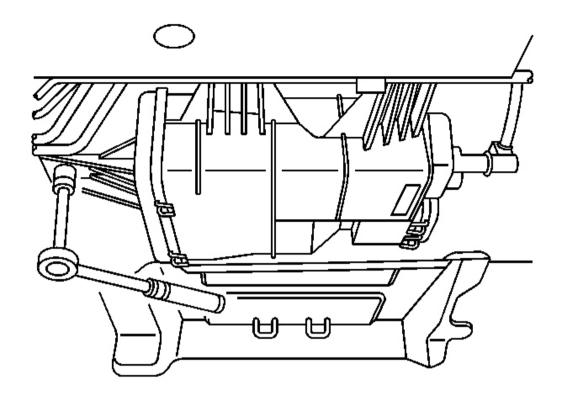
View Of Evaporative Emission (EVAP) Canister Vent Solenoid Valve Courtesy of GENERAL MOTORS CORP.
